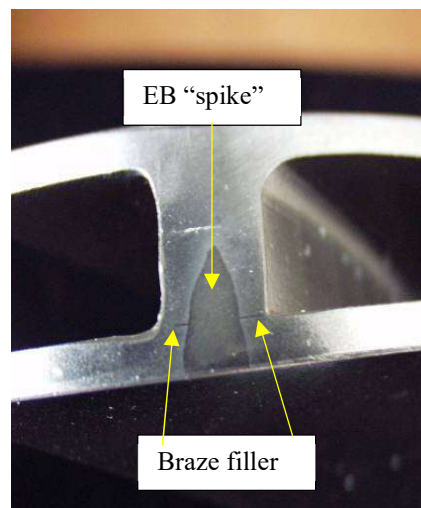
Close-up of EBraze™ joint (surface etched to enhance view of joint)
